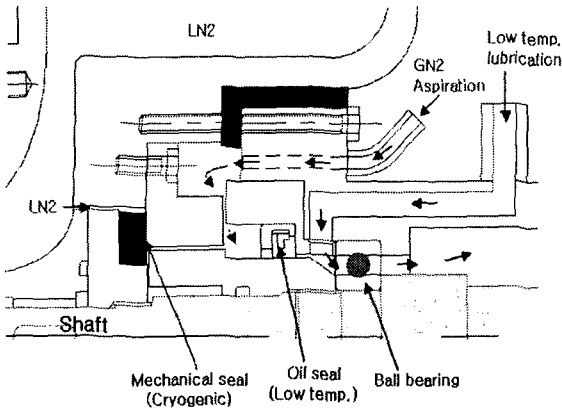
Conceptual drawing of bearing lubrication and seal system
